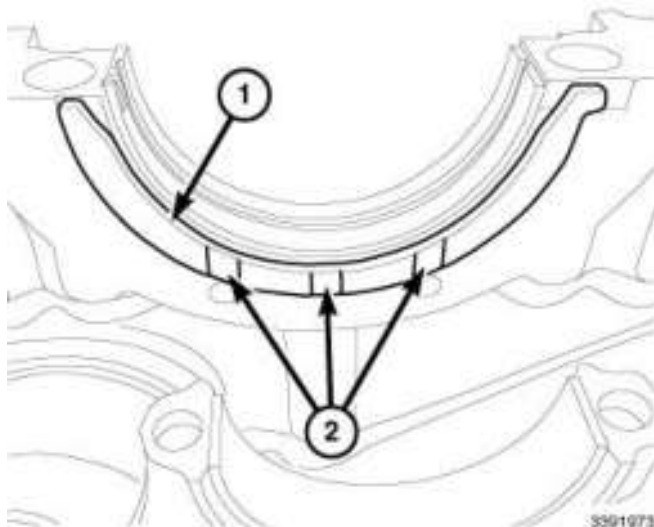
Thrust Bearings & Oil Discharge Grooves
